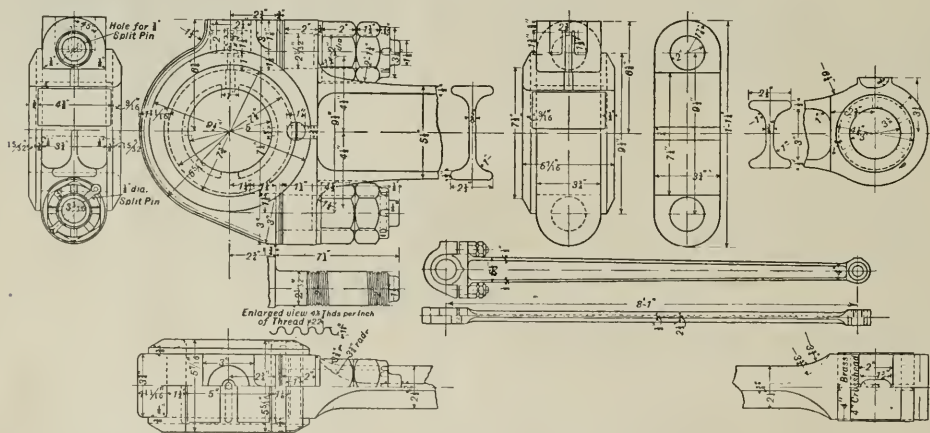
DETAILS OF OUTSIDE CONNECTING ROD
